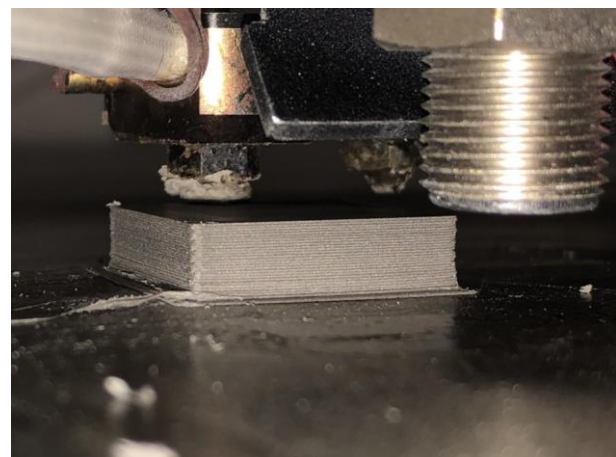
Extrusion of Ultrafuse 316LX filament on Felix Tec4 machine.
